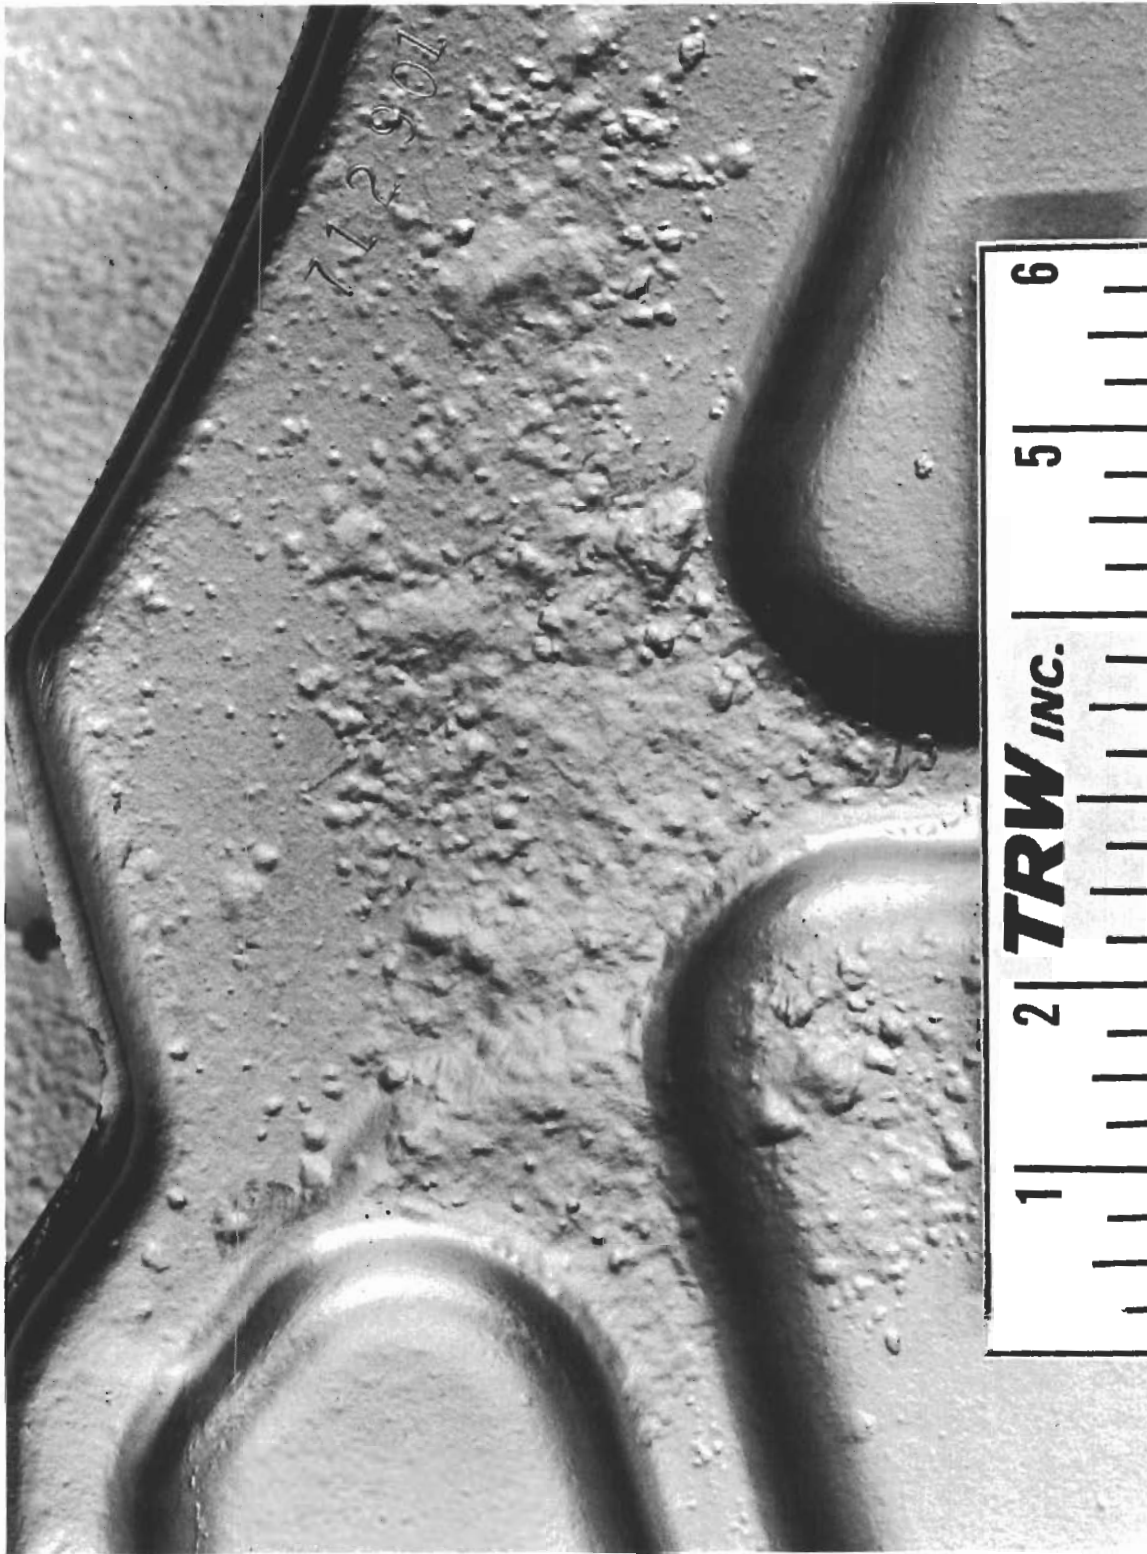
Pitted Surface Condition Exhibited in Localized Areas of the Lower Die Side of the Sixth Ti 6Al-4V Bulkhead Forging Produced (of Seven Forgings Total), the Fifth of the Five Delivered to TRW) with the 50,000 Ton Hydraulic Press.
